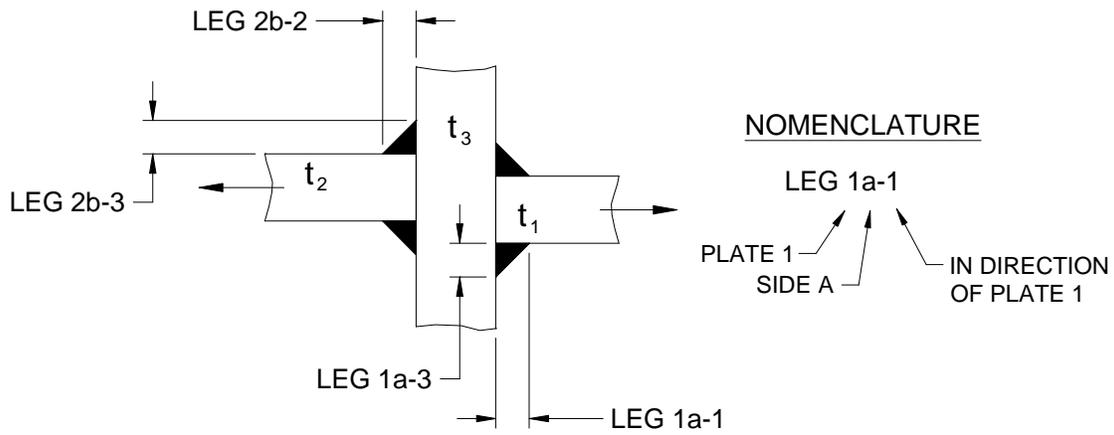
Cruciform Joint Weld Geometry – Variables
